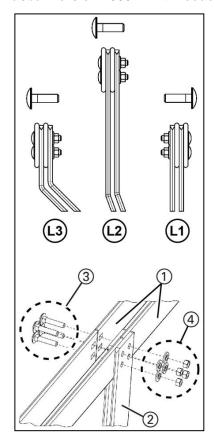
Busbar 2500 A, feeder 2500 A, Ur = 24 kV, end panel with mounted insulating shells
